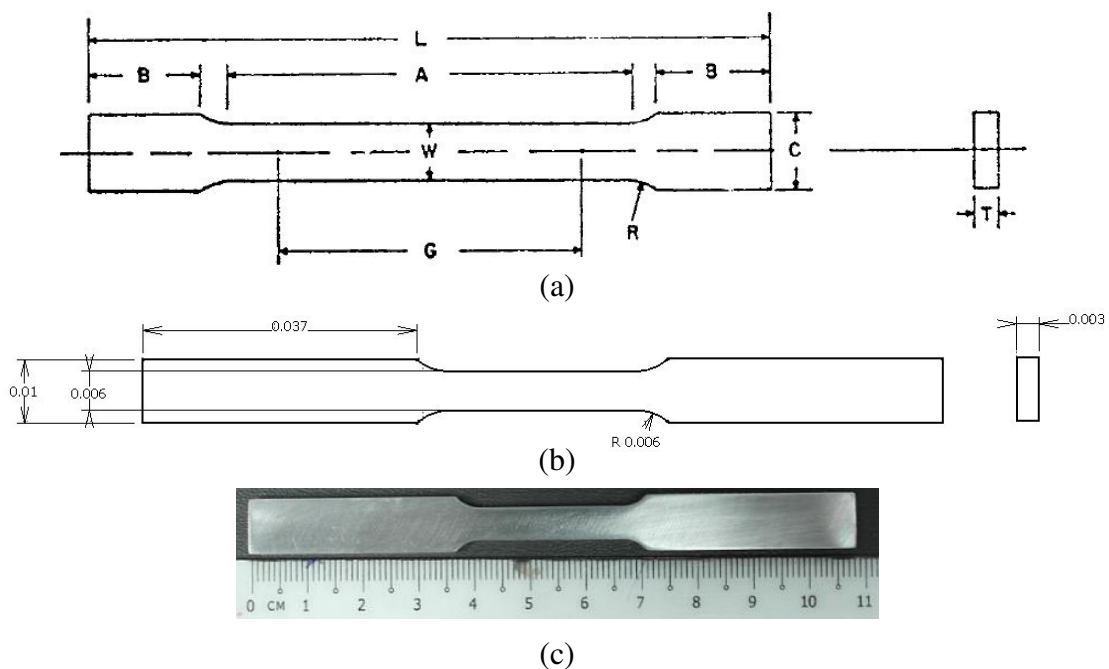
A specimen for the tensile test: (a) geometry based on ASTM E8/E8M-11 (2012), (b) specimen modelling, (c) photograph of the specimen
